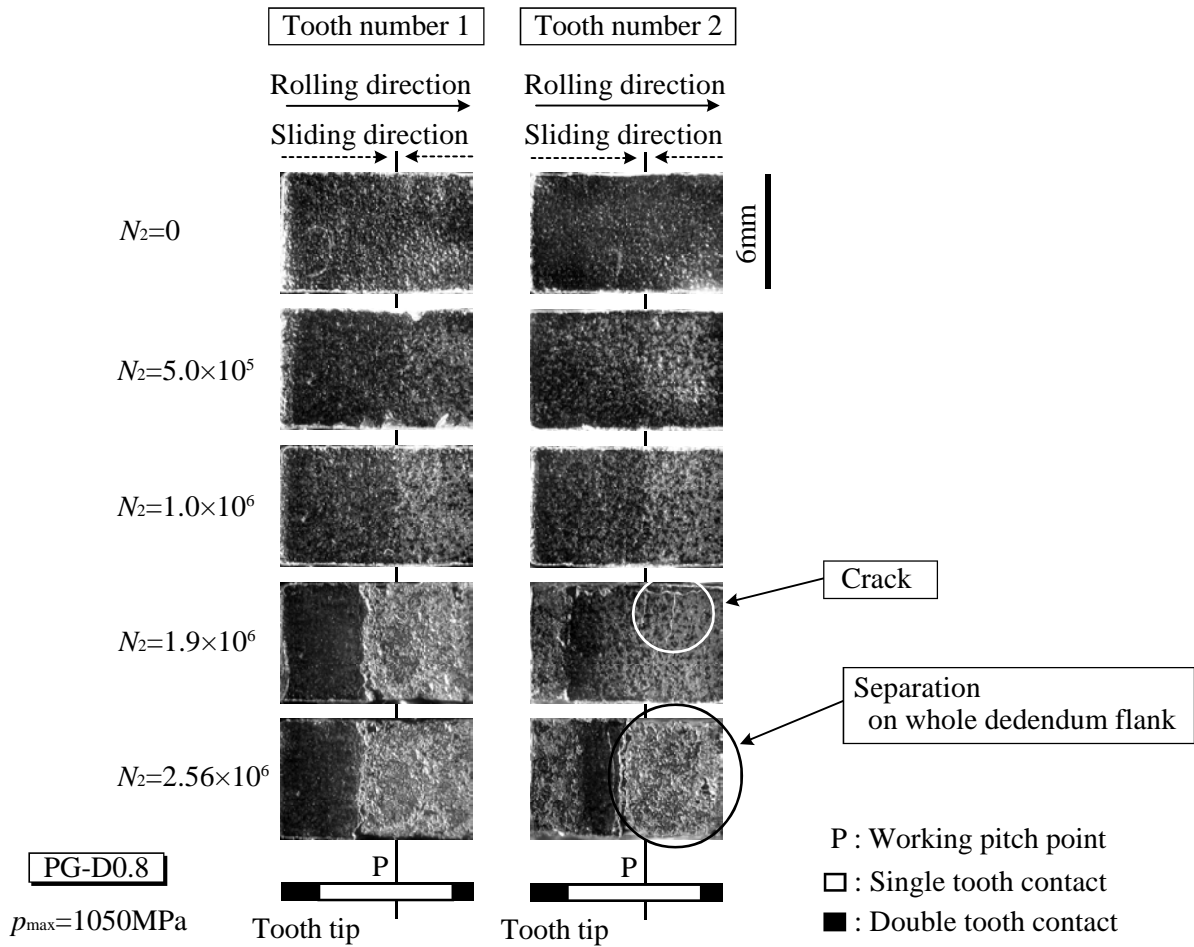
Tooth surface photographs of failed teeth during fatigue test
